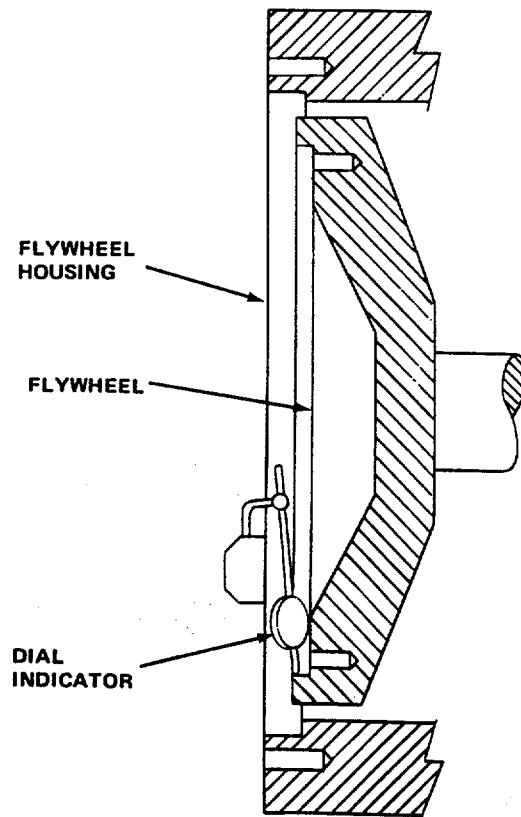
Checking Flywheel Pilot Bore Eccentricity
